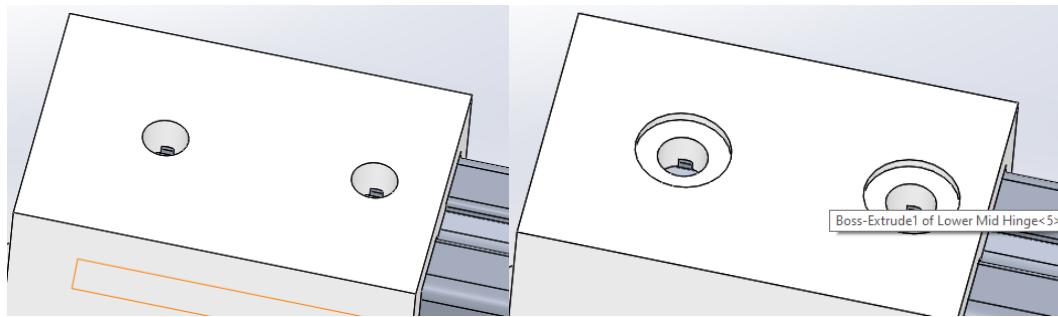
Original Holes on Assembly (left) and Holes After Cut-Extrude Change (right)
